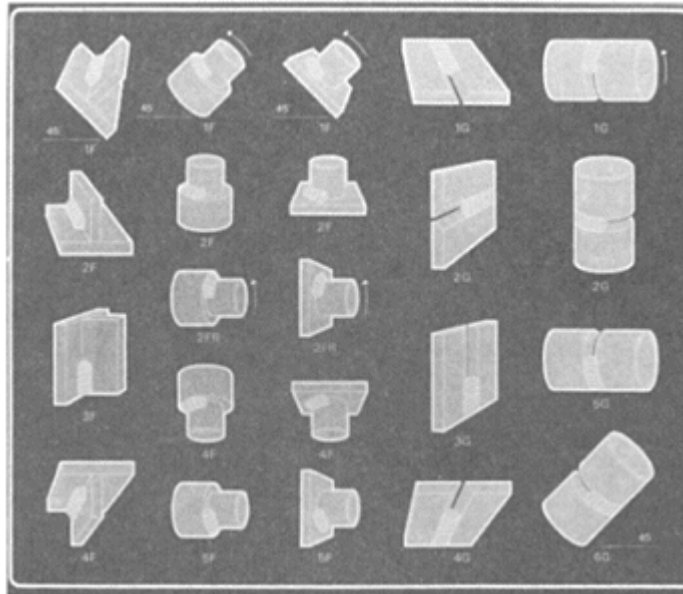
The basic test positions for fillet and groove welds, as defined by ASME IX.
